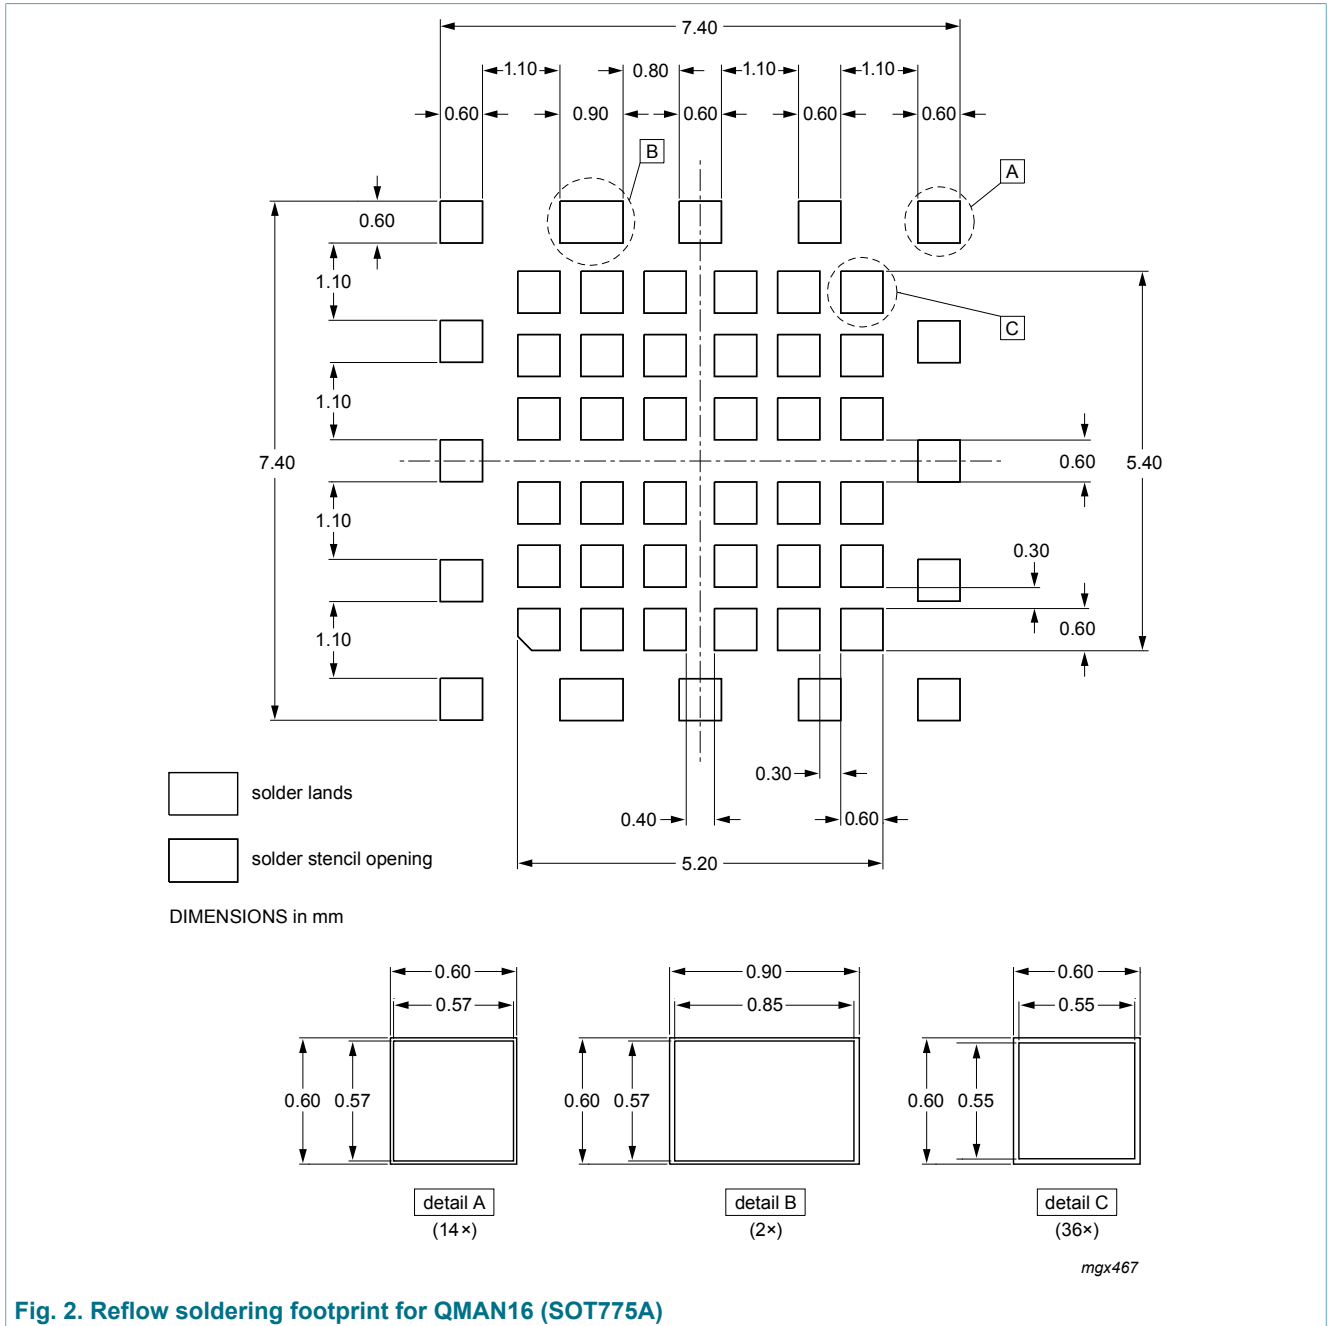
Reflow soldering footprint for QMAN16 (SOT775A)
